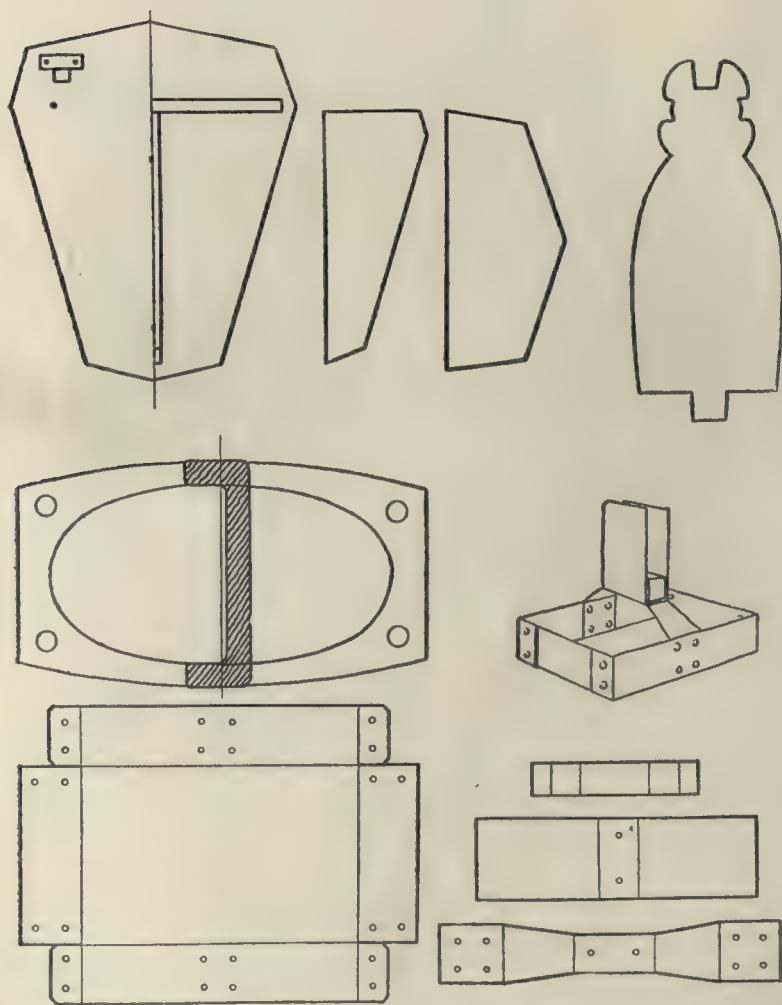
WORKING DRAWINGS: BRACKET SHELF; PATTERN FOR CANDLESTICK; CLAY DISH; MATCHBOX HOLDER. IN ACTUAL USE THESE DRAWINGS ARE MADE FULL SIZE.
